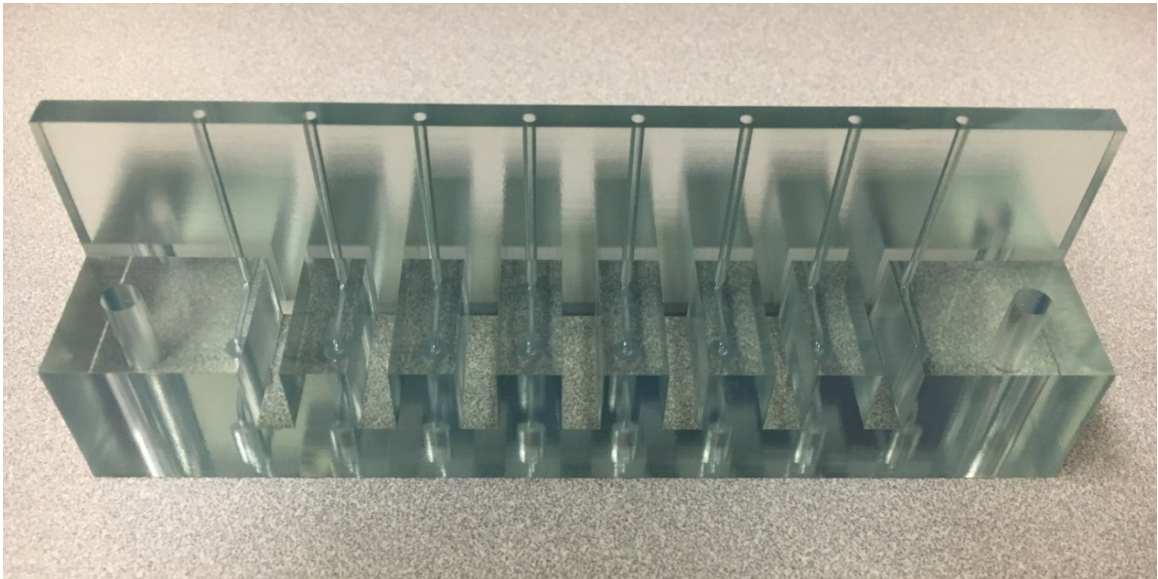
Drug toxicity testing device part manufactured using SL for the company Entox Sciences LLC
